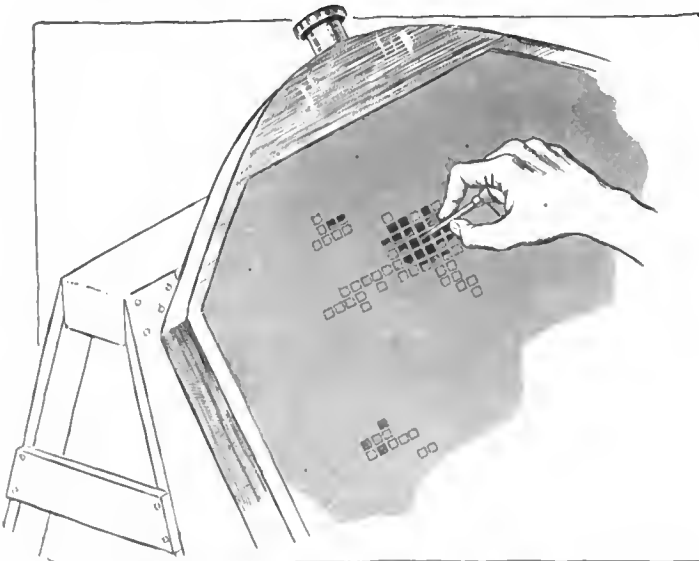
Emery on the end of a fine rod will clean tube rupture
